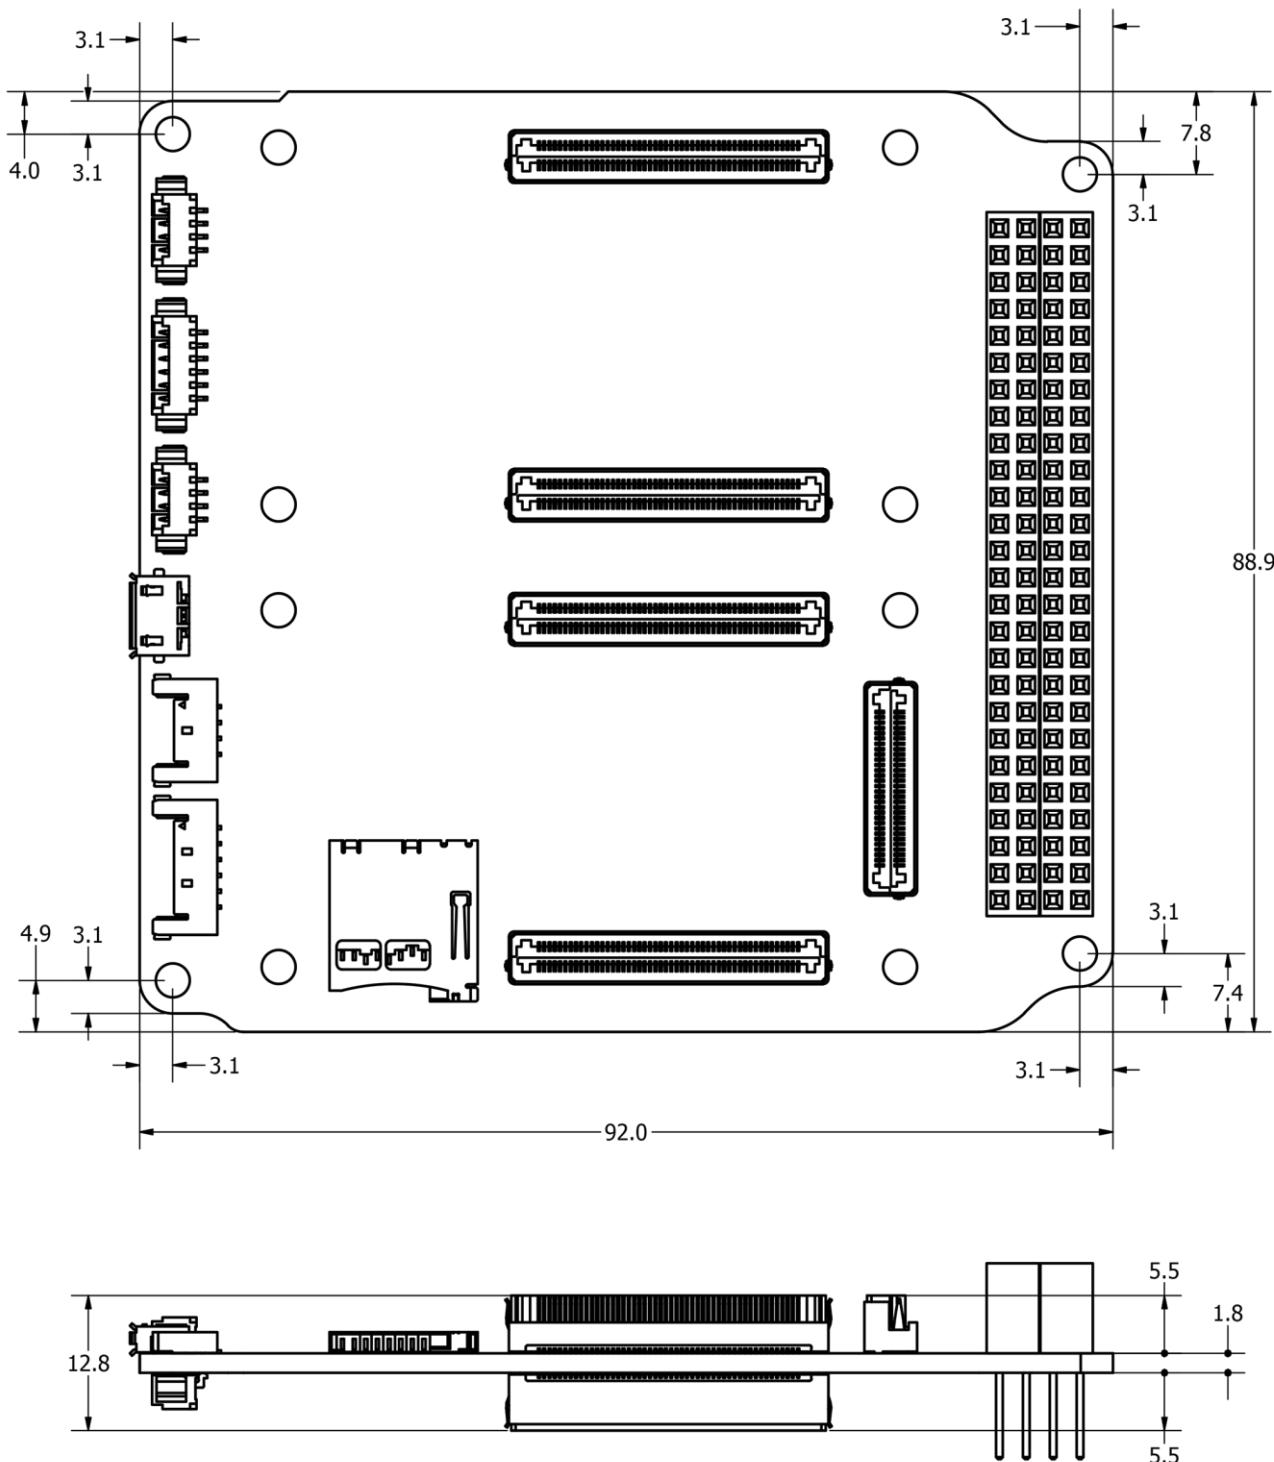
Mechanical drawing of the NanoDock SDR
